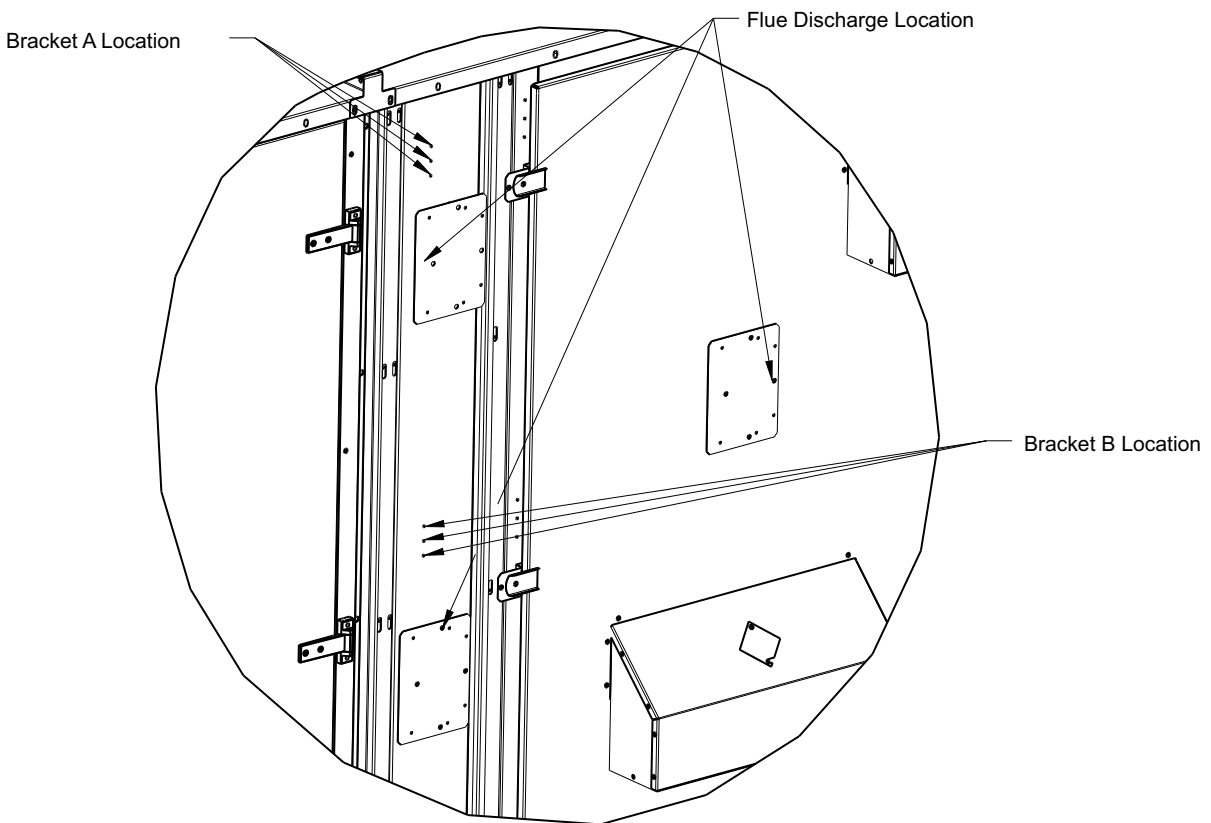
Flue Discharge Deflector Mounting Position — High Heat (Detail View)
